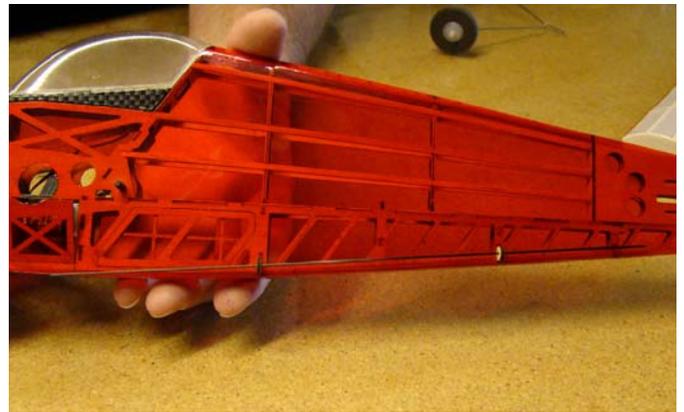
Take the shorter carbon rod and put it on the left side of the aircraft (side with servo mounted closest to tail section) and install with no glue. Cut a 2 ¼” length of piano wire and put a small z-bend in it.
